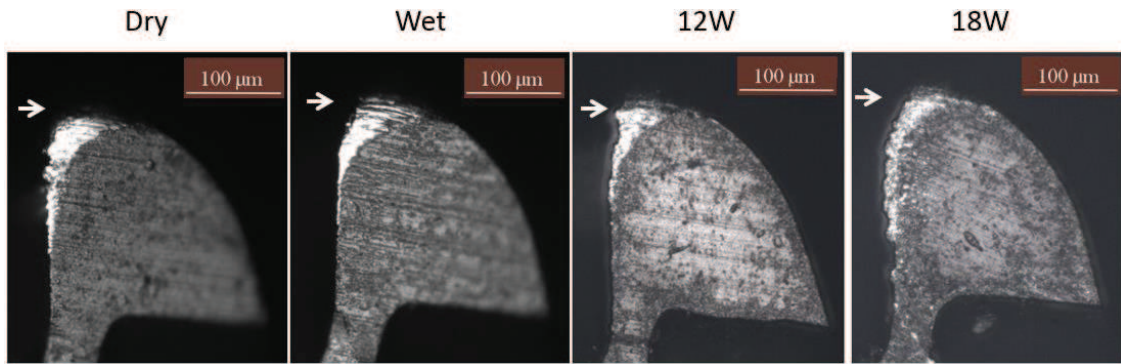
Tool bottom edge wear for dry, wet, 12 W, 18 W cases; machining condition
